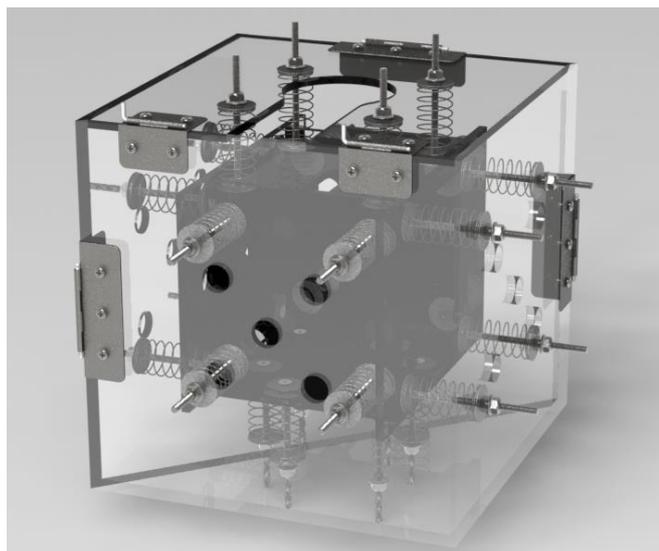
Mechanical Force Gauge image (by Solid Works)
